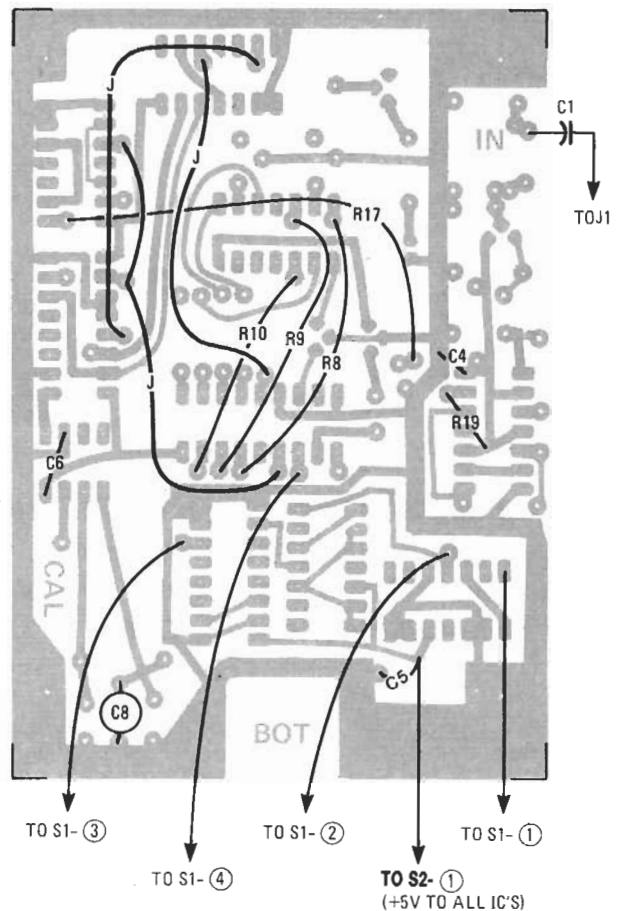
PARTS PLACEMENT DIAGRAM for the bottom side of the circuit board.
